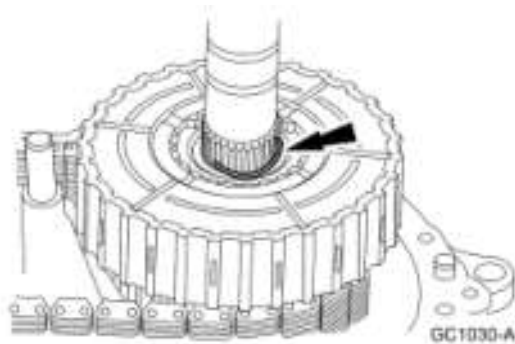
Locating Clutch Pack Assembly & Snap Ring
